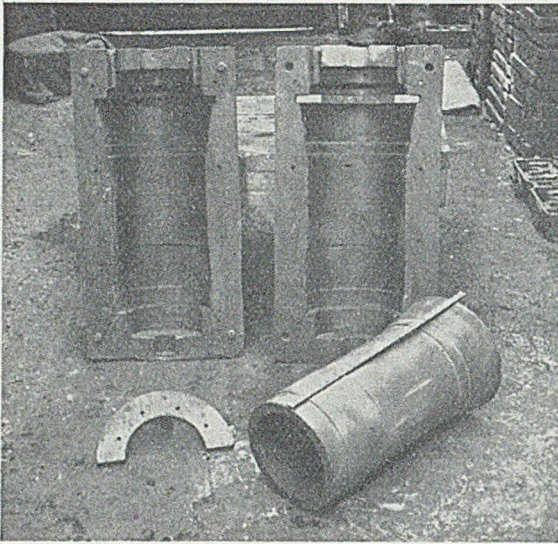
Cylinder-liner Casting, 10 in. dia. by 22 in. long (weighing 205 lb.) and Shell Halves from which it is produced. For this Casting the Shell Mould is supported by Sand Backing.
